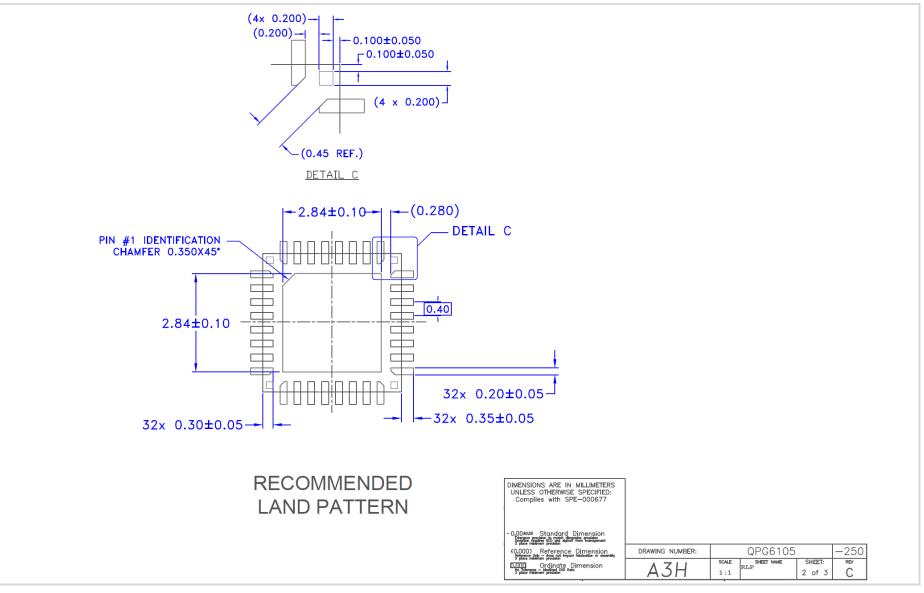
QFN32 Package Drawings and Dimensions (Refer to Product Change Notification # 22-0072)
